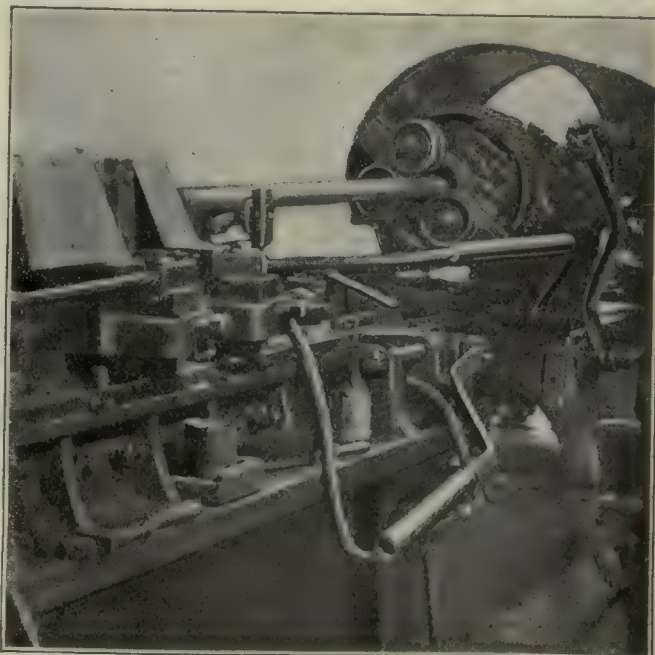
THE THREE-ROLLER, OR HARTZ TYPE, MACHINE
